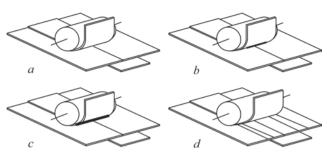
Scheme of optimal process of hot air welding of laminated fabric: 1 — laminated fabrics being welded; 2 — pressdown roller; 3 — connecting tape from laminated fabric; 4 backing tape from laminated fabric; 5 — PVC melt that forms during welding; 6 — PVC flash from welded joint sides
